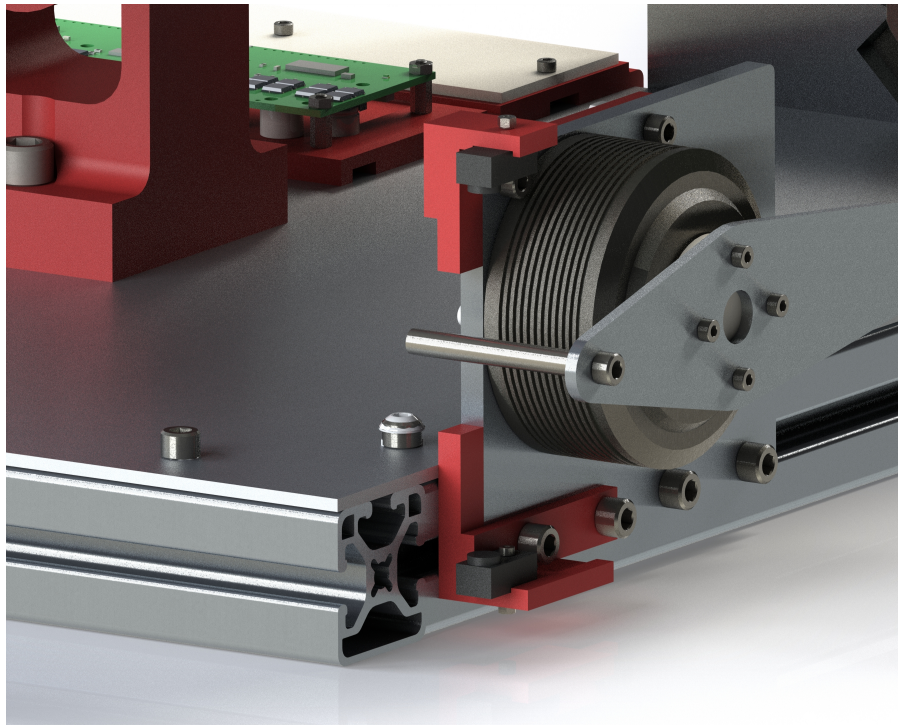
CAD Render of Motor Mount Assembly.
